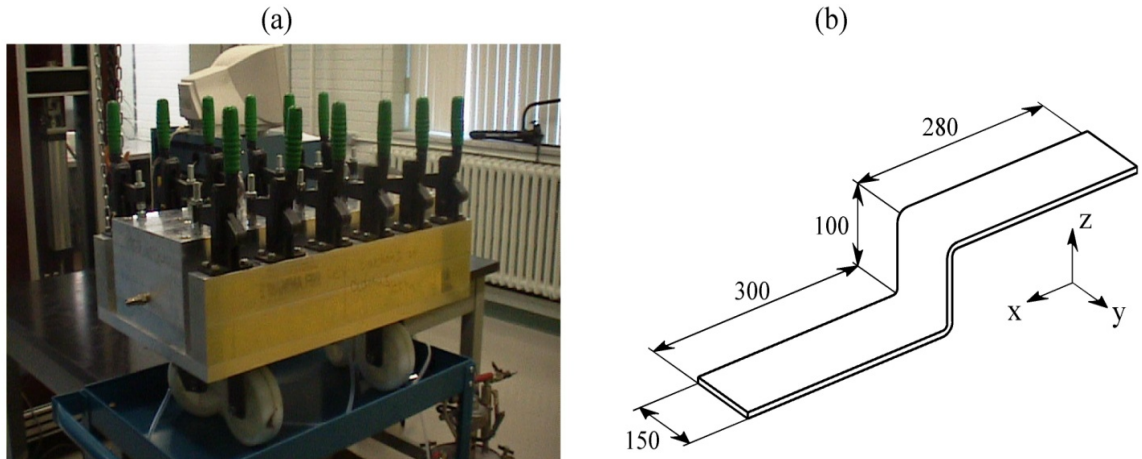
Implementation of Flexible Injection in curved parts: (a) experimental mold; (b) geometry of the part (dimensions are given in mm)
